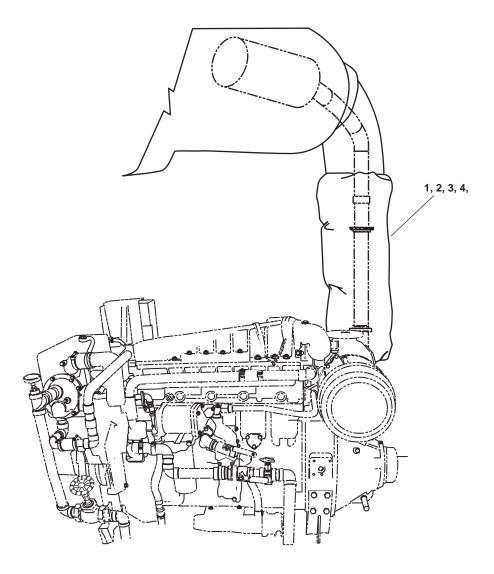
Engine Exhaust System (Sheet 1 of 3)
